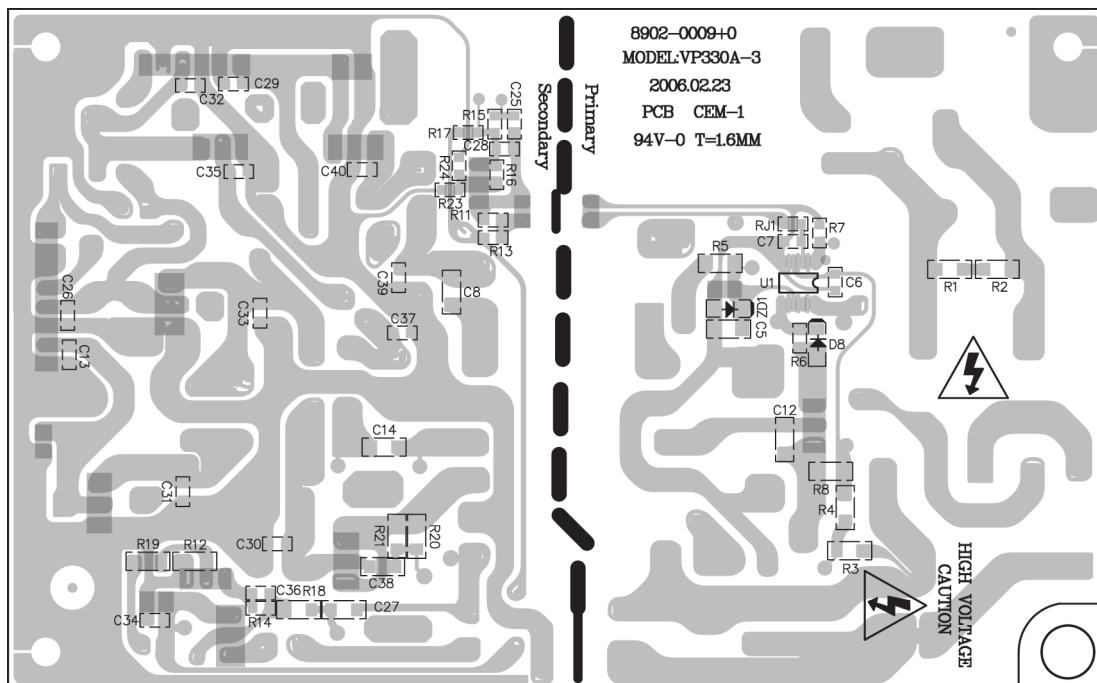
Switch Mode Power Supply PCB Bottom Etch and Component Layout
